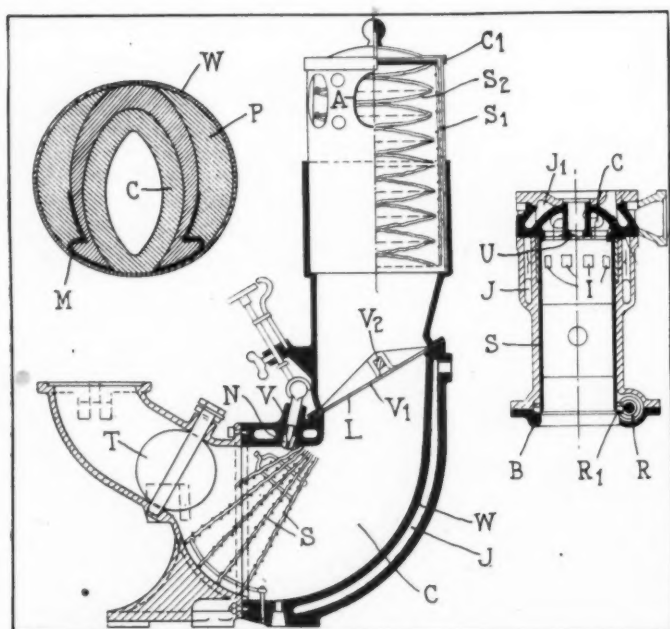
Margetts tire-making mold. Fig. 2—Thompson screen carbureter. Fig. 3—Gerhardt sleeve-valve motor
